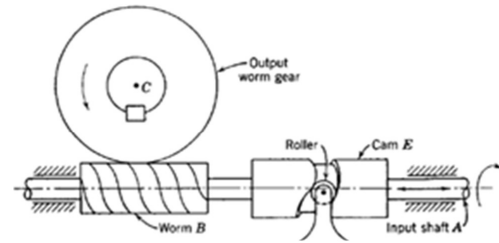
Gear-Cam mechanism with worm gear drive [1].
